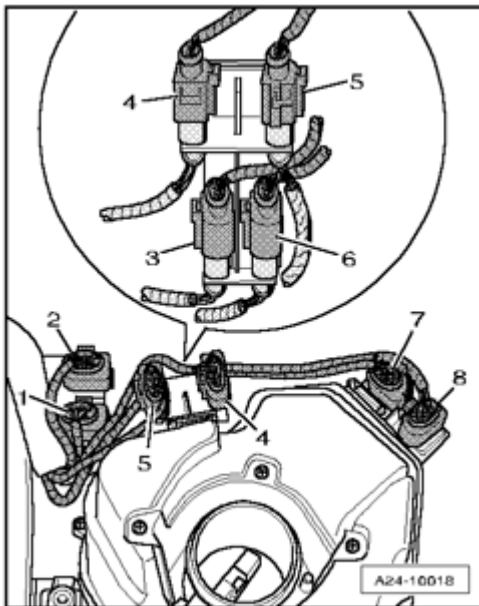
Oxygen Sensors Electrical Harness Connectors
